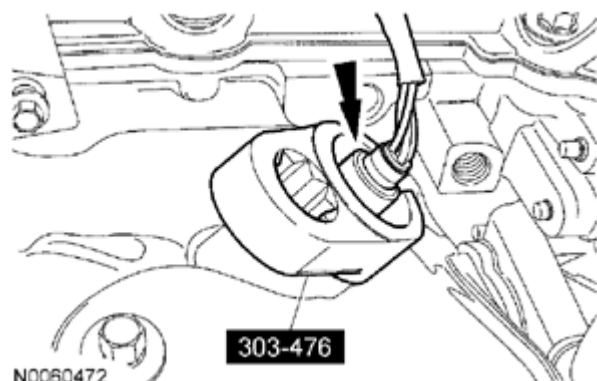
Installing RH Heated Oxygen Sensor Using Exhaust Gas Oxygen Sensor Socket
